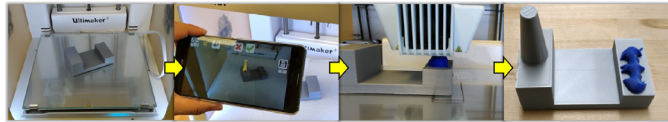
An hand-held AR interface [101] for design 3D shapes with respect to an existing physical and then the 3D design is sent to 3D printer for fabrication.
